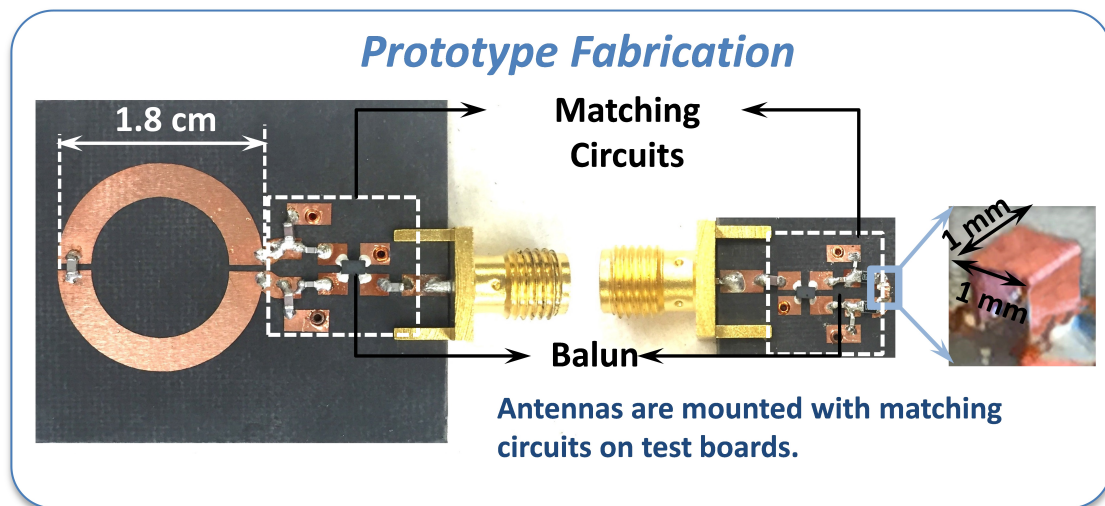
Prototypes of transmitting and implanted antennas mounted on test boards with matching circuits.
